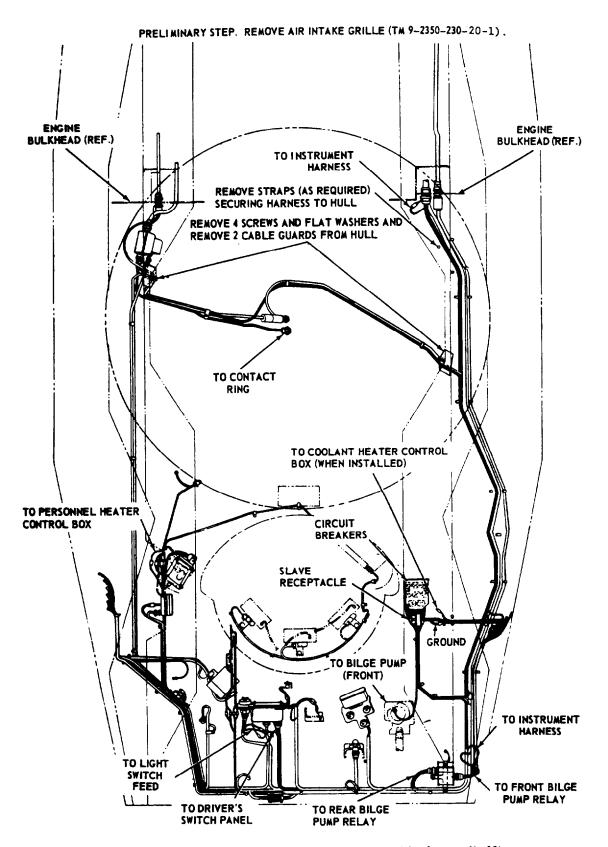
Removal/installation — hull front power wiring harness (1 of 3).
